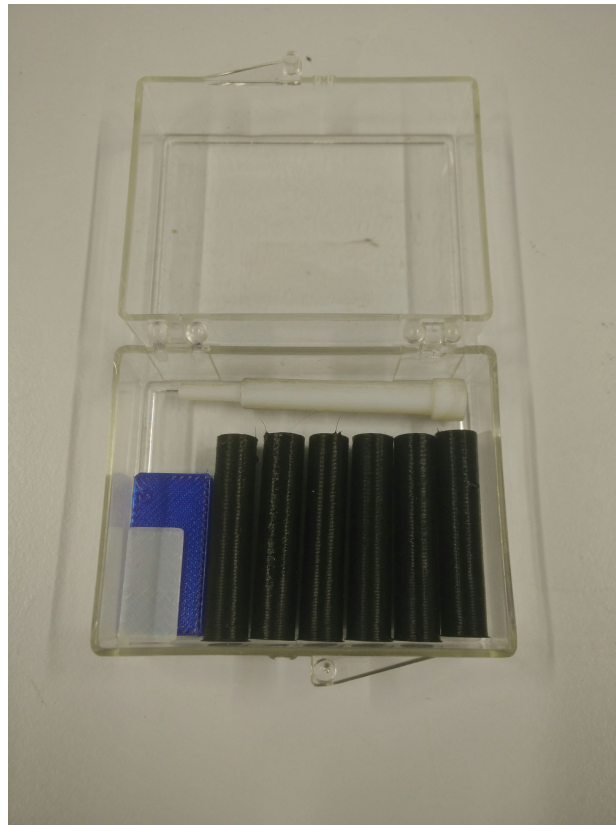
The first sensor fabrication trying to achieve spiral shape.
